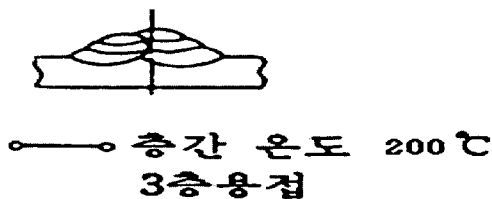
Schematic view of 3 pass welded cast Iron
